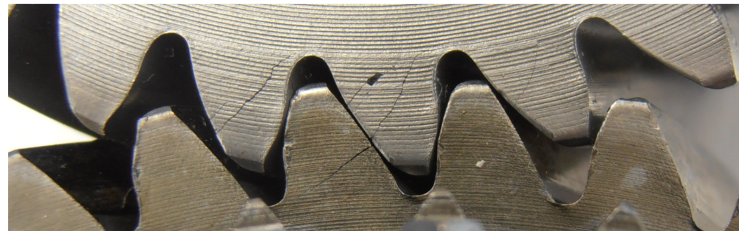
Meshing of PM rolled gears with asymmetric profile, both gears have already cracks.
